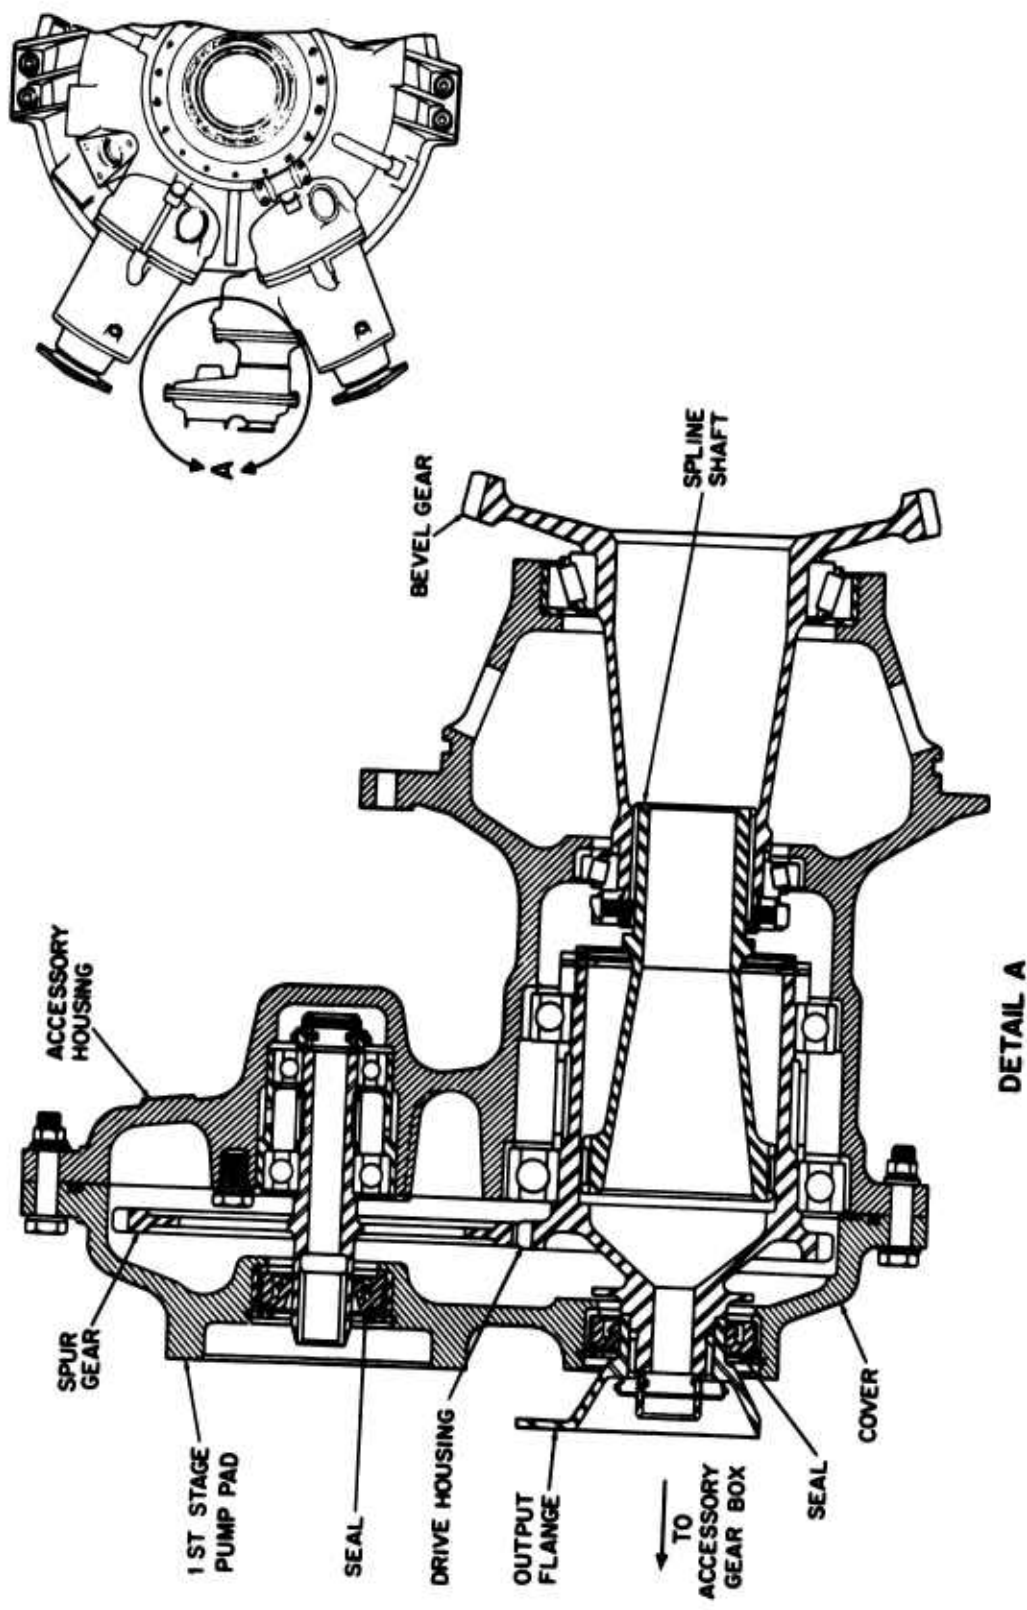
CH-53 Main Gearbox Accessory Takeoff.
